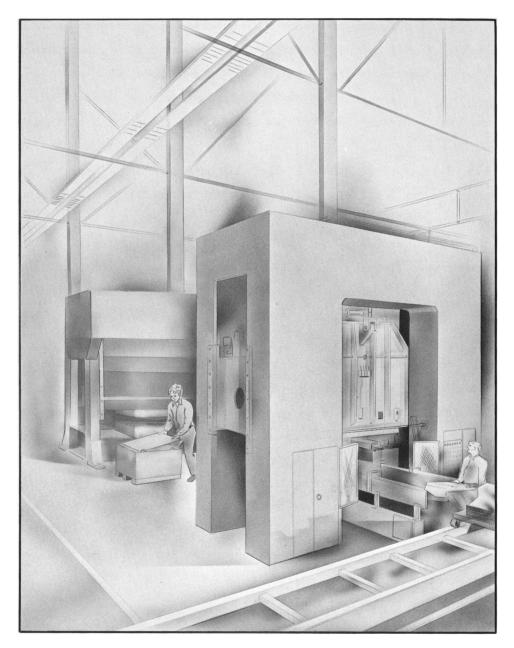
TYPICAL STAMPING EQUIPMENT
